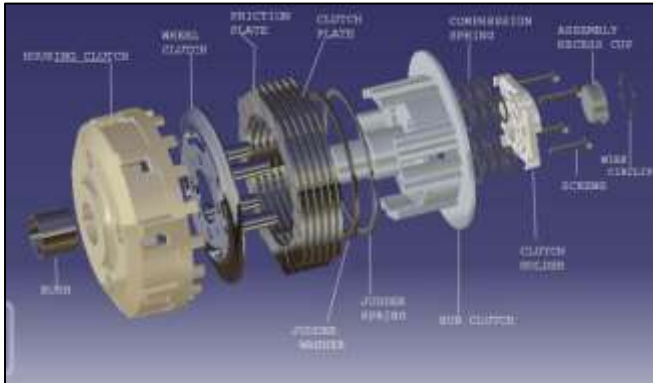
Assembly of Multi Plate type wet clutch [5]
